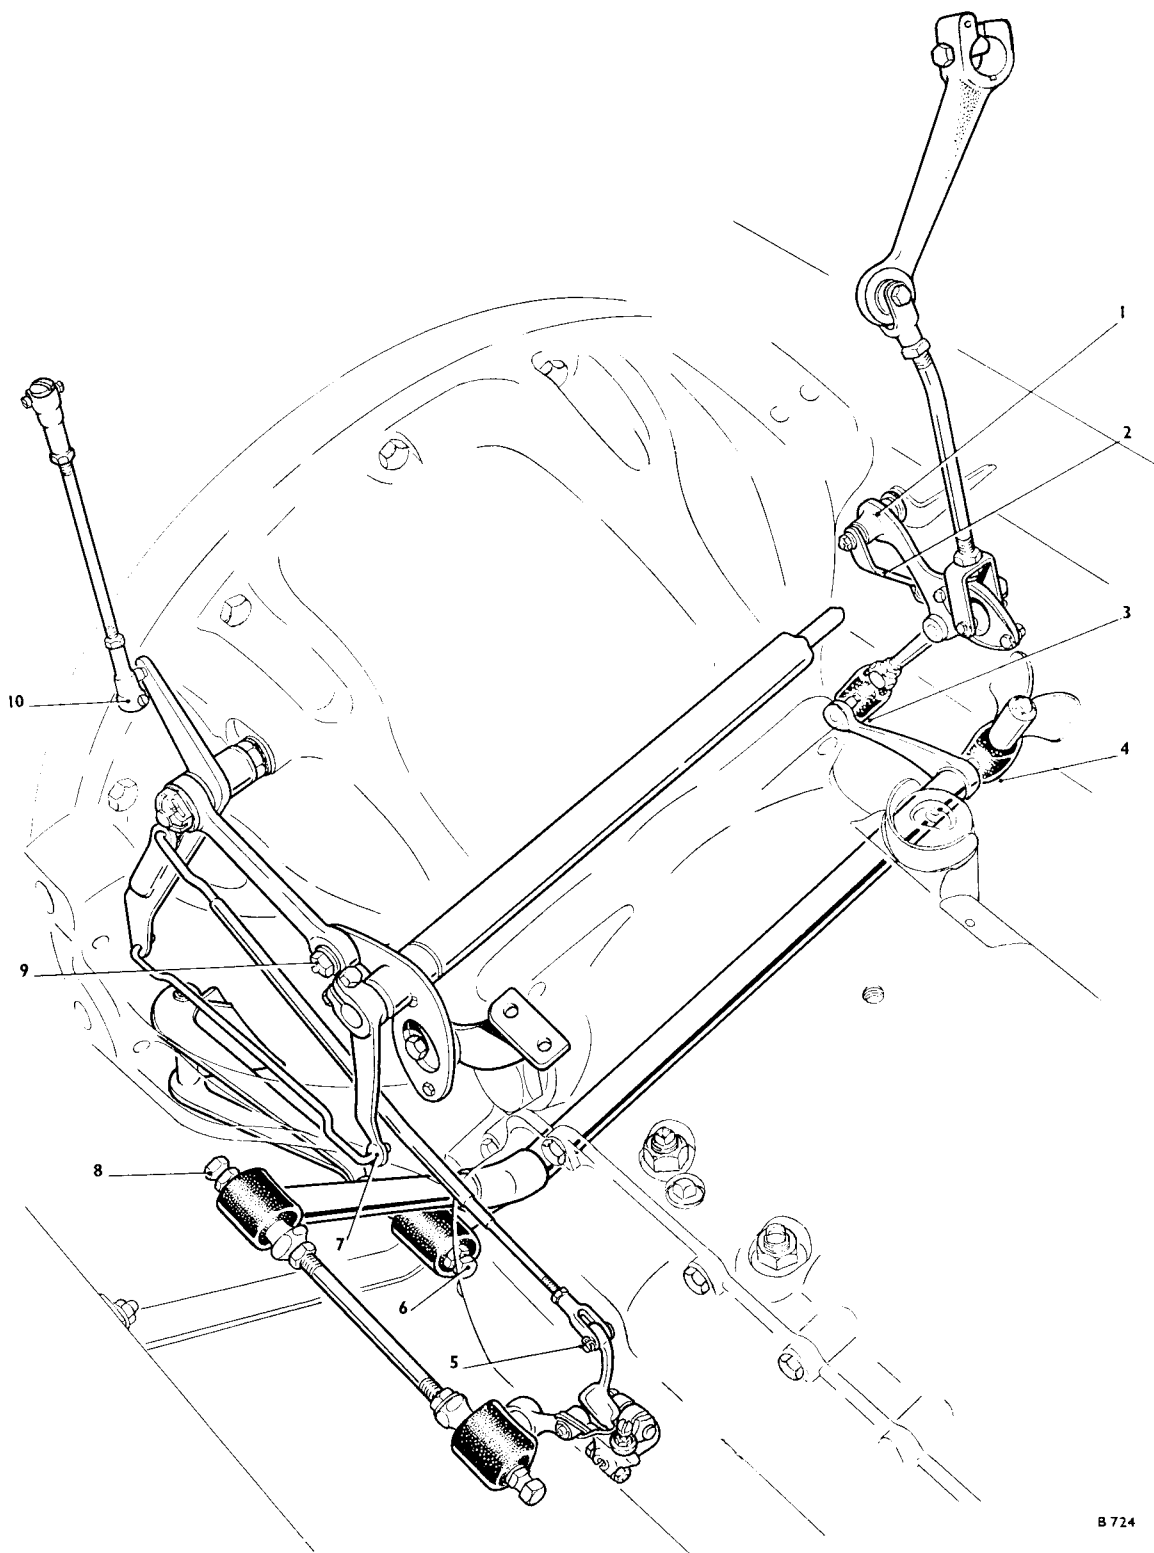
Gear selector and throttle controls — right-hand drive — late S2 cars
